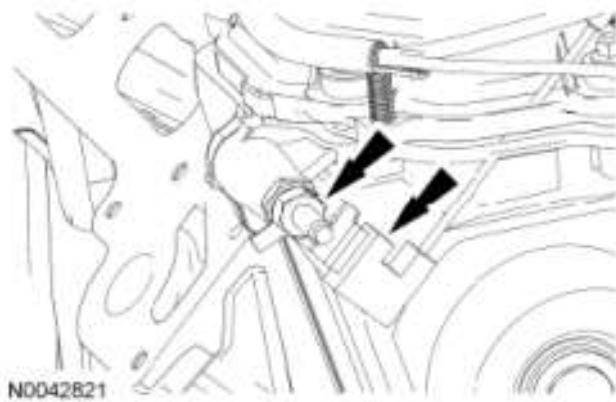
Locating CHT Sensor Jumper Wire Retainer
